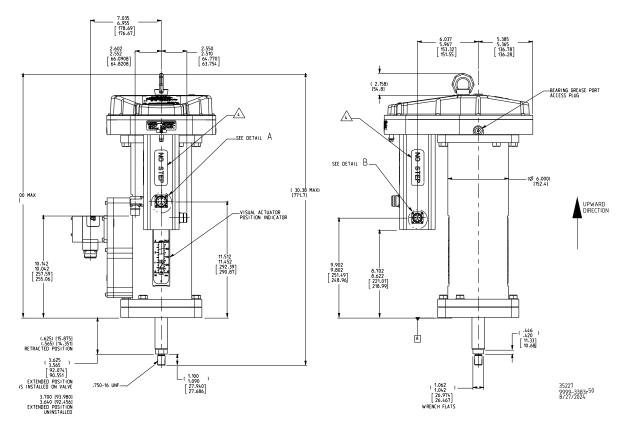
ELA7 & ELA13 Outline Drawing
